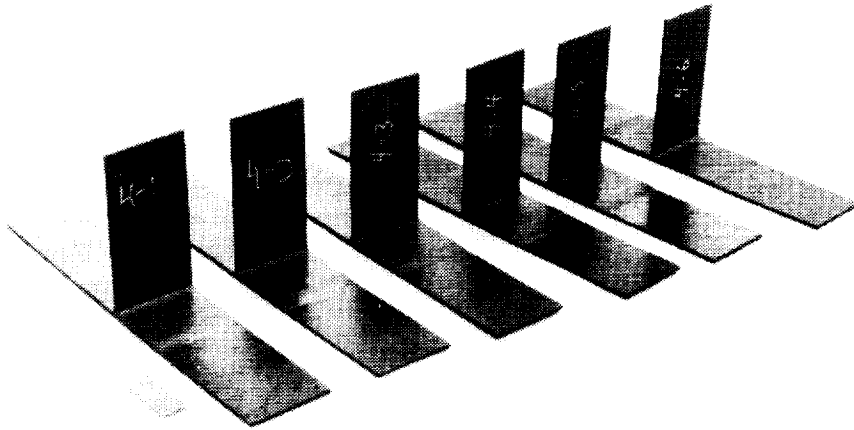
Blade Frame Element Panels were Machined into Pull-Off Specimens
